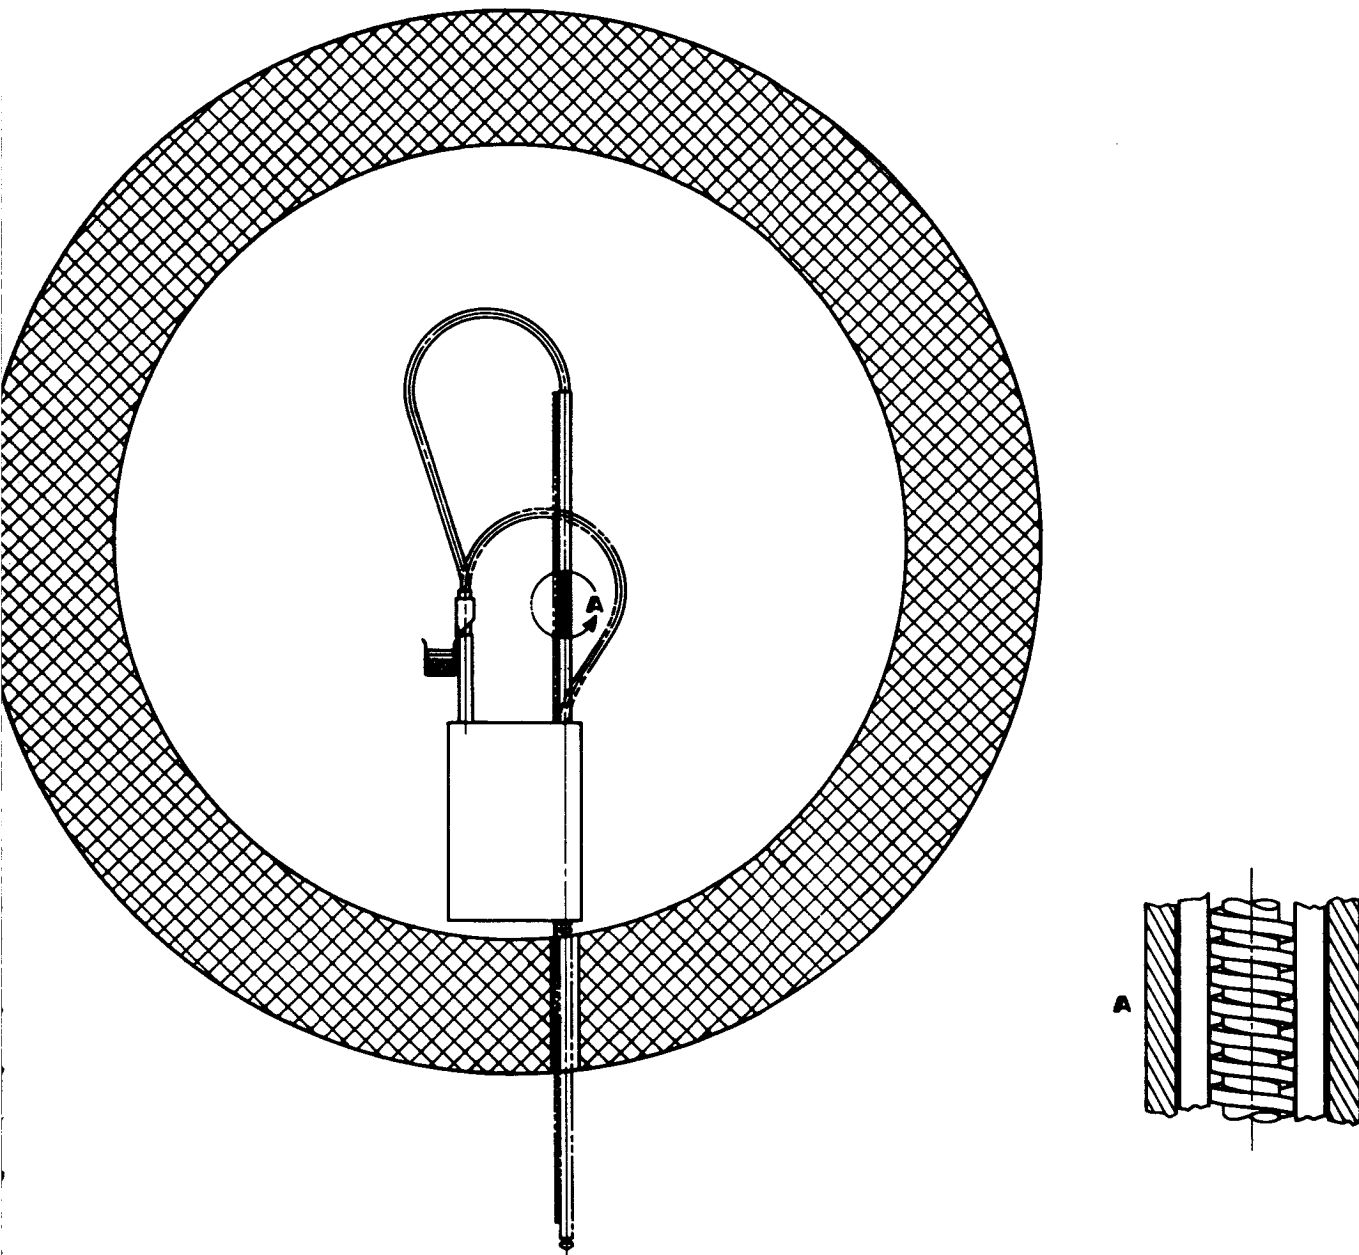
Flexible helical screw conveyor rotary drill sampler
